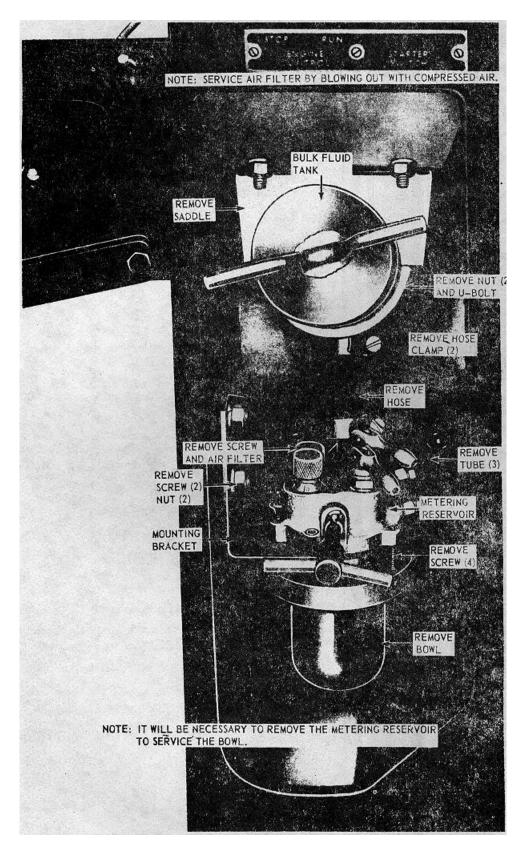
Ether primer fluid tank and metering reservoir, removal and installation.
